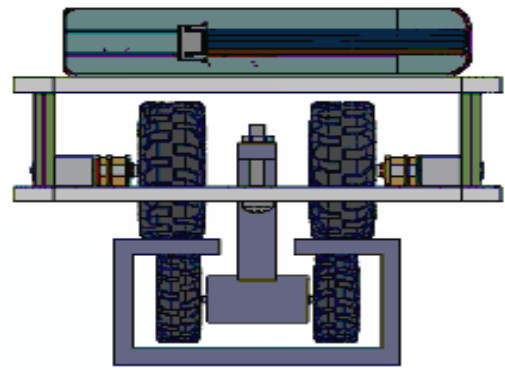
Rear model views of structured rail-guided wall Climbing Robot
